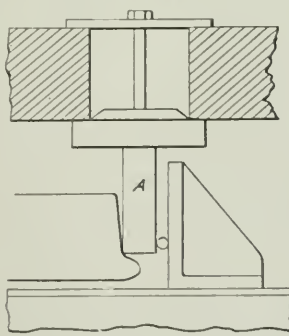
Method of Breaking Wheel Flanges in Testing Machine.
